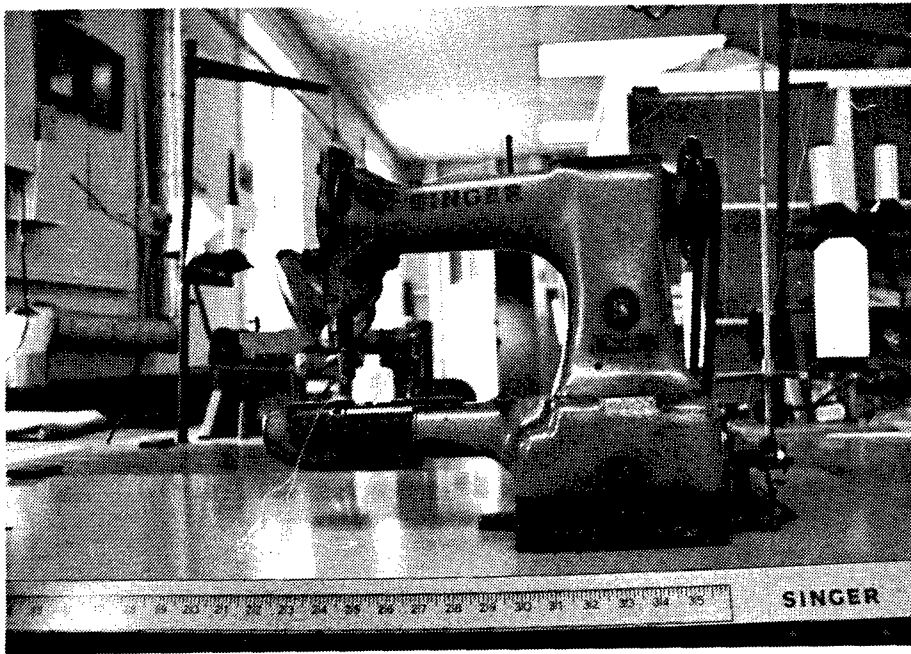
Building 4705-4: Singer sewing machine in the Laundry Building.
